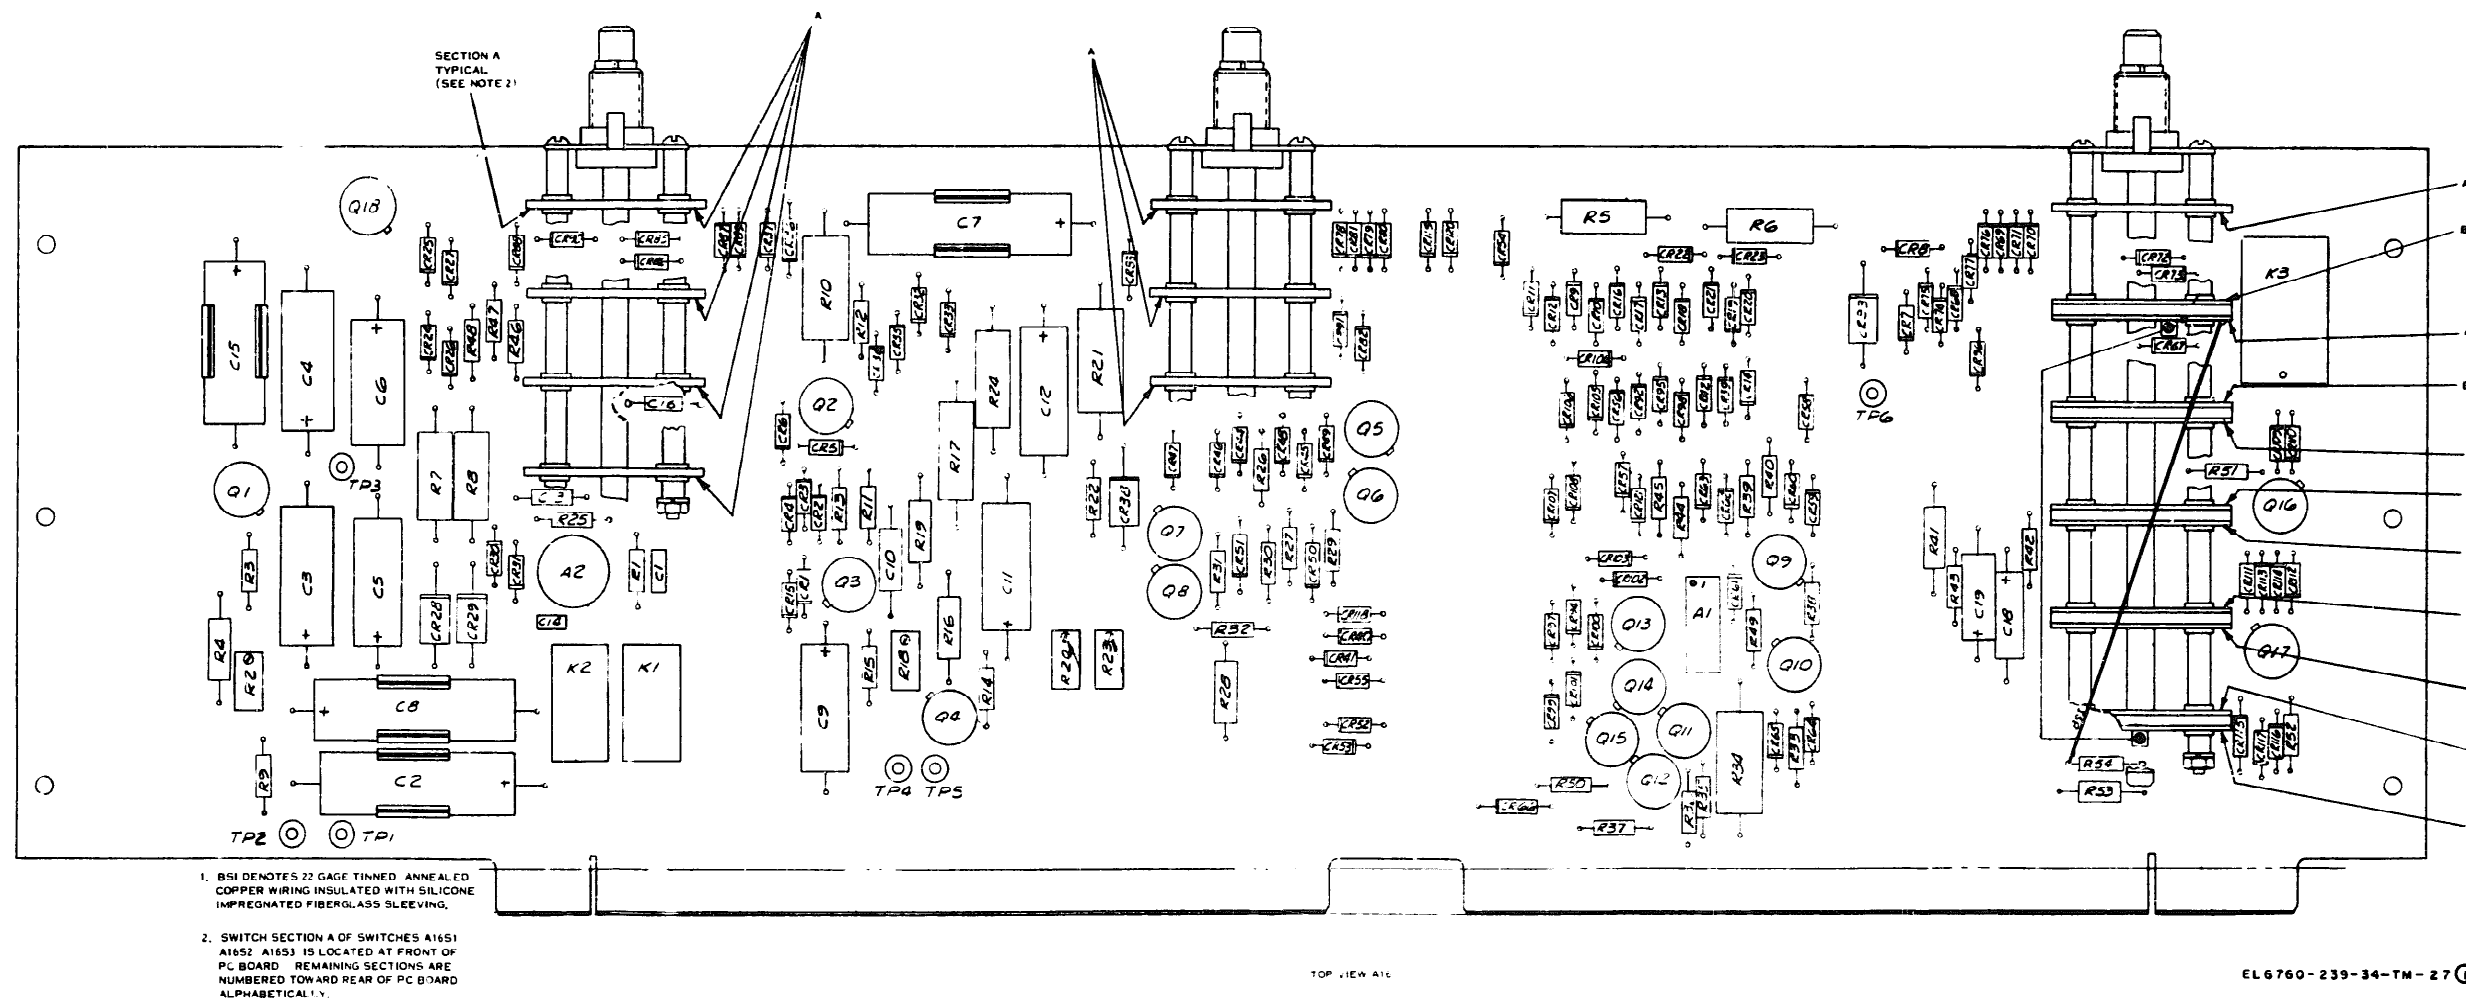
(1). Printed circuit board and component assembly, wiring diagram (sheet 1 of 4).
